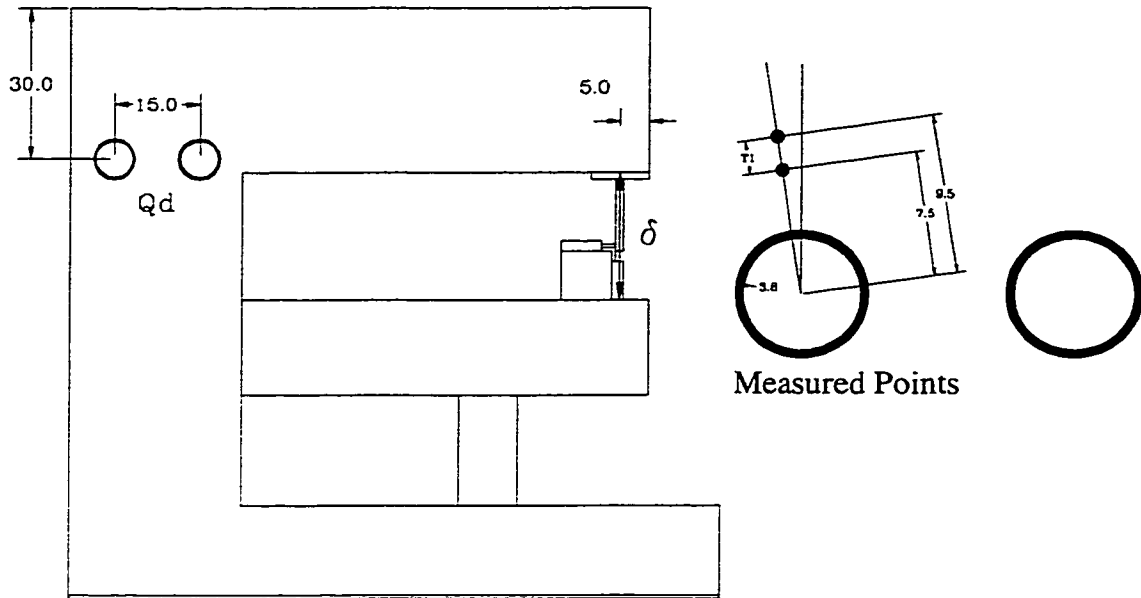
Schematic Drawing of Linear Test Model (Dimensions in Centimeters)
